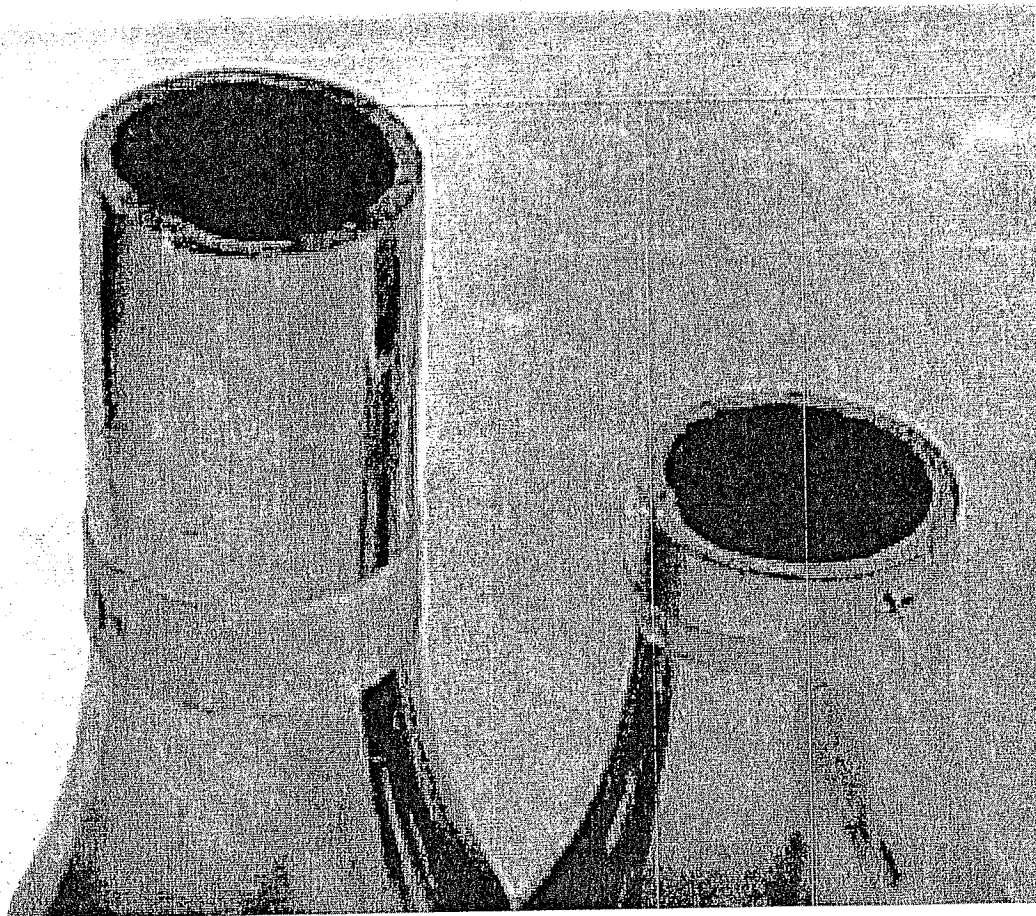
Fractured specimen with longitudinal crack (specimen T 11, $N_f = 38,503$)
